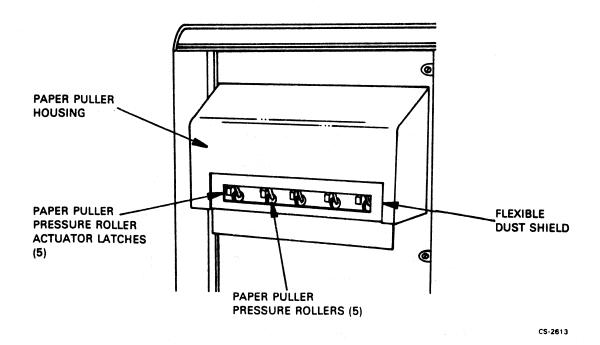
Paper Puller Actuator Latches and Pressure Rollers
